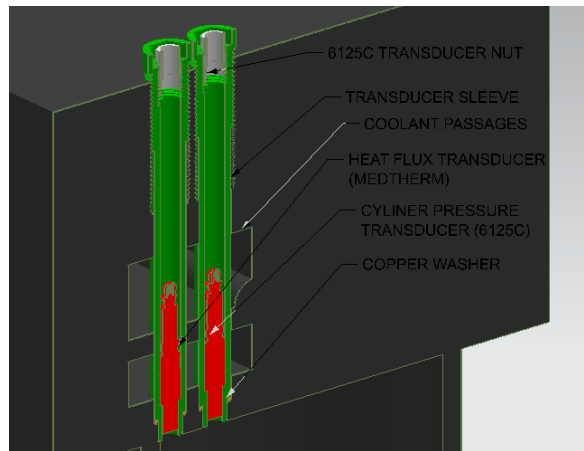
CAD Model of Heat Flux and Cylinder Pressure Transducer Assembly
